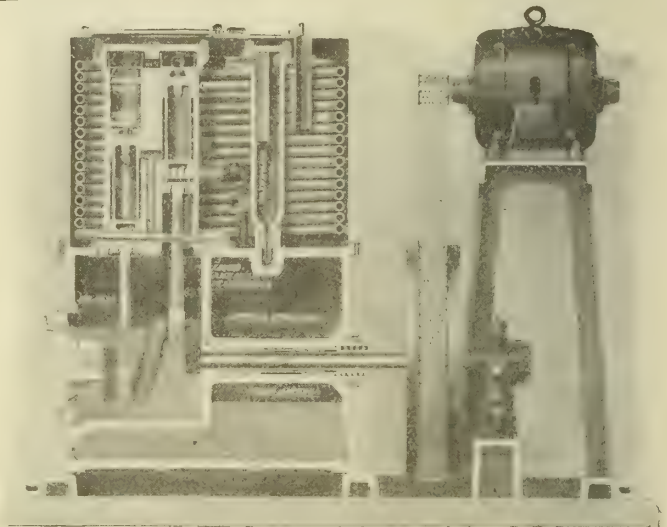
SECTIONAL VIEW FIVE-TON PEERLESS REFRIGERATING MACHINE
